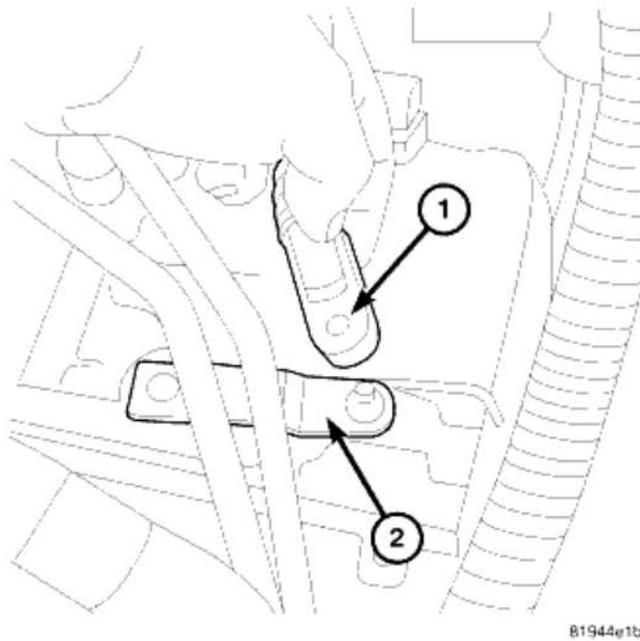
Identifying Gearshift Cable & Transaxle Manual Valve Lever
